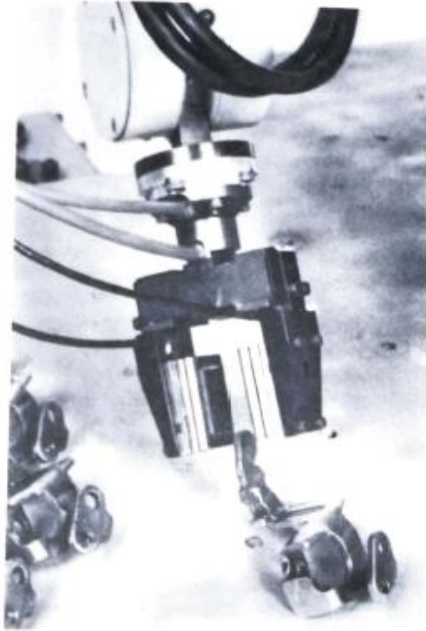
Tactile array sensor device mounted in a mechanical gripper. (Photo courtesy of Lord Corporation.)
